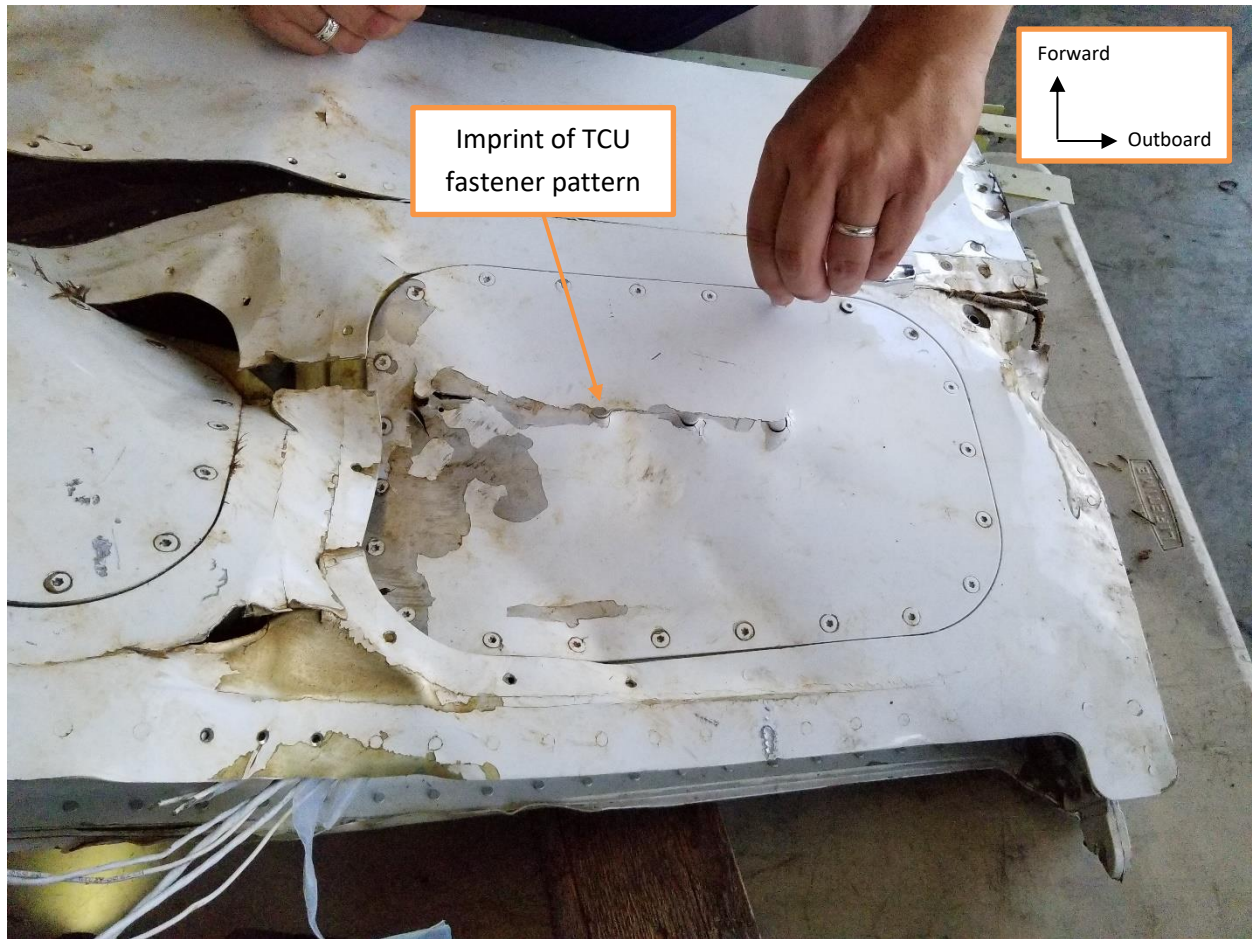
LH wing extension (lower surface shown) showing imprint of TCU
